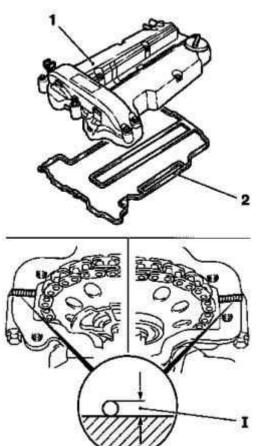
Replacing Cylinder head: 1 - cover of the cylinder head, 2 - Seal
